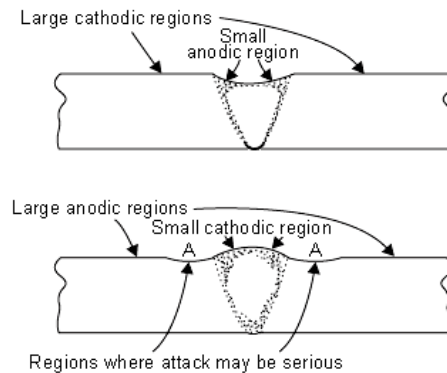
Galvanic corrosion in welded joint, Top: weld metal less noble than base metal, Bottom: weld metal more noble than base metal
